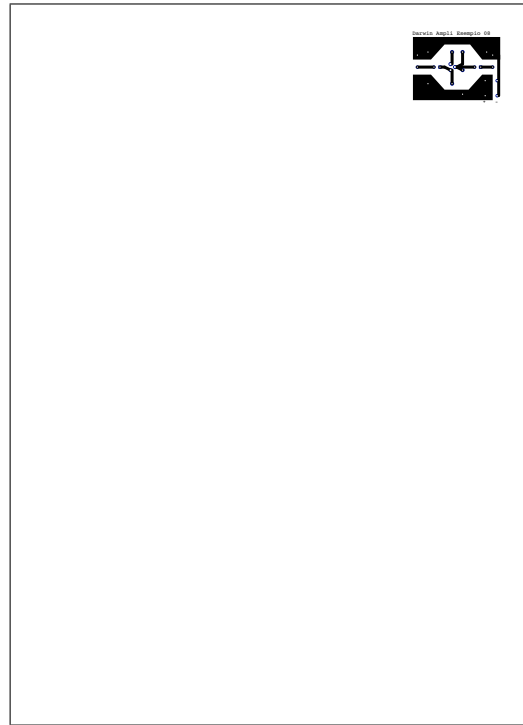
The PCB, as it appears when printed (mirrored) on a ISO-UNI A4 sheet.
